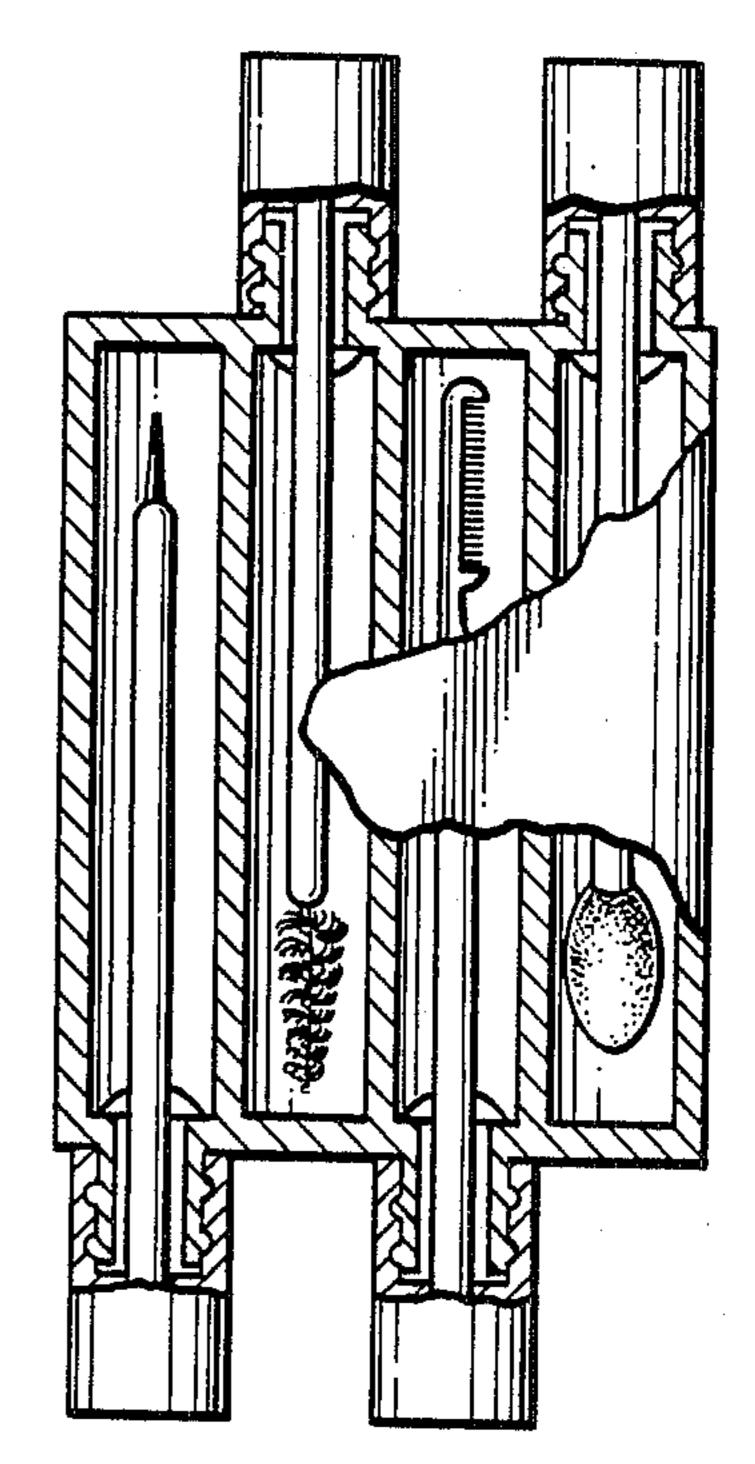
is an exploded rear elevational view showing a tenth embodiment of our new design;
